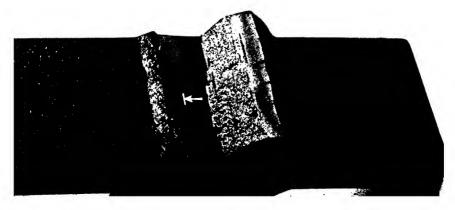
Butt Weld Failure under Fatigue Load
